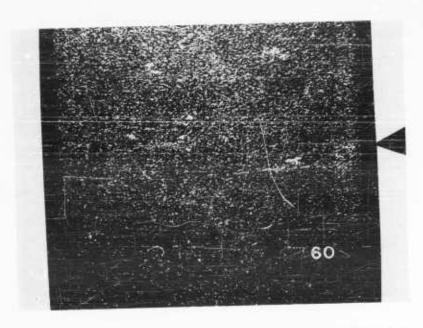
FAILURE IN SPECIMEN NO. 60
